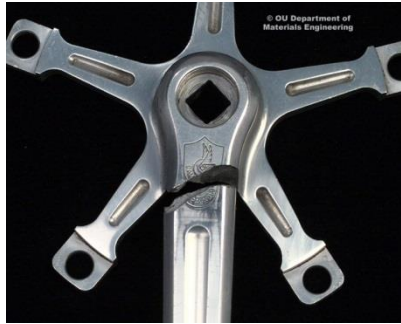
Bicycle crank failure (image courtesy of the Open University Department of Materials Engineering) [69]
